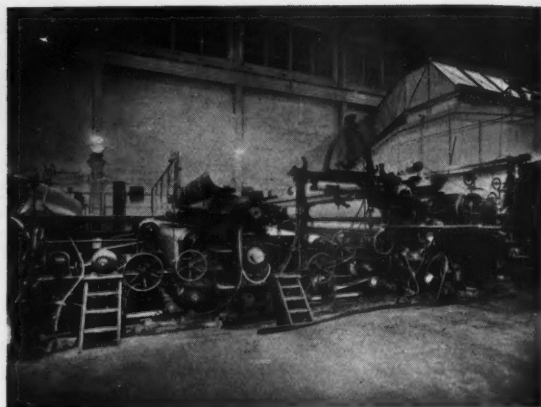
A View of a Paper Mill—Directional Lighting is necessary across the Couch Press.
